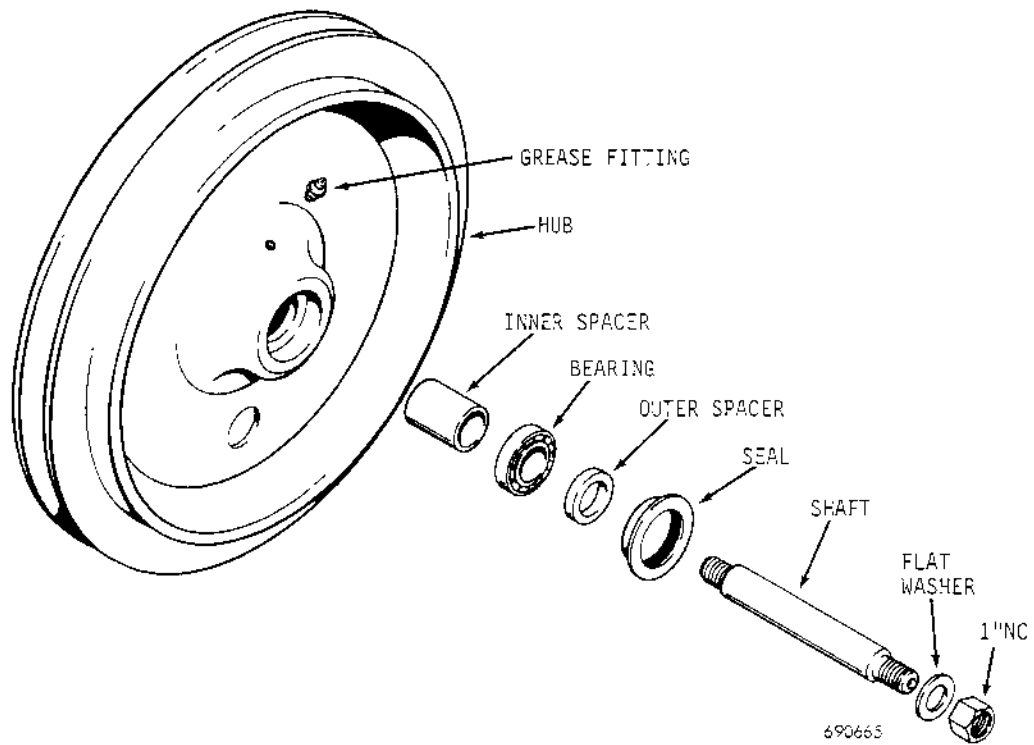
Exploded View of Idler Wheel (Models 350 and 310G After S/N 3039619)
